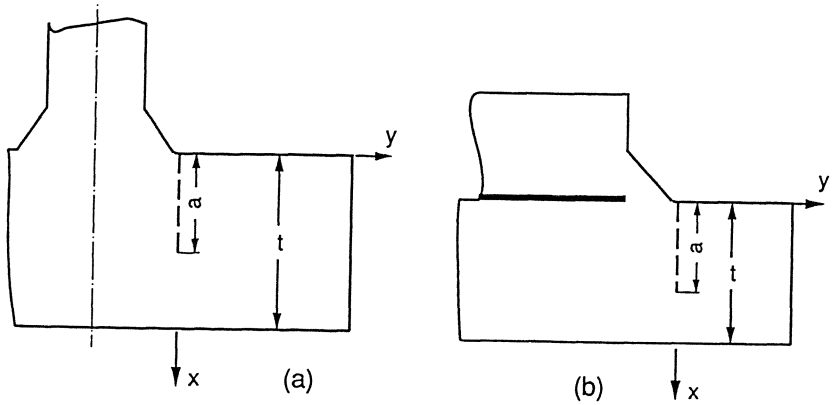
(a) a weld between a bracket and a plate; (b) a fillet weld
